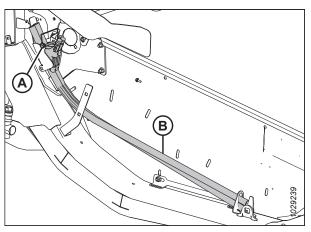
Divider Rods in Storage Location at Right Header Endsheet
